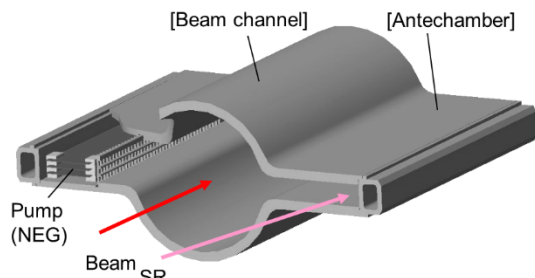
Typical cross section of a beam pipe at arc sections for LER.
